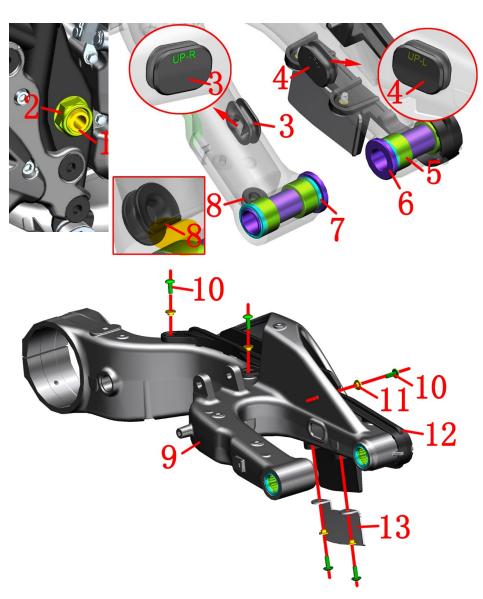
R	Rear wheel,	Door whool occombly	CHK	401
